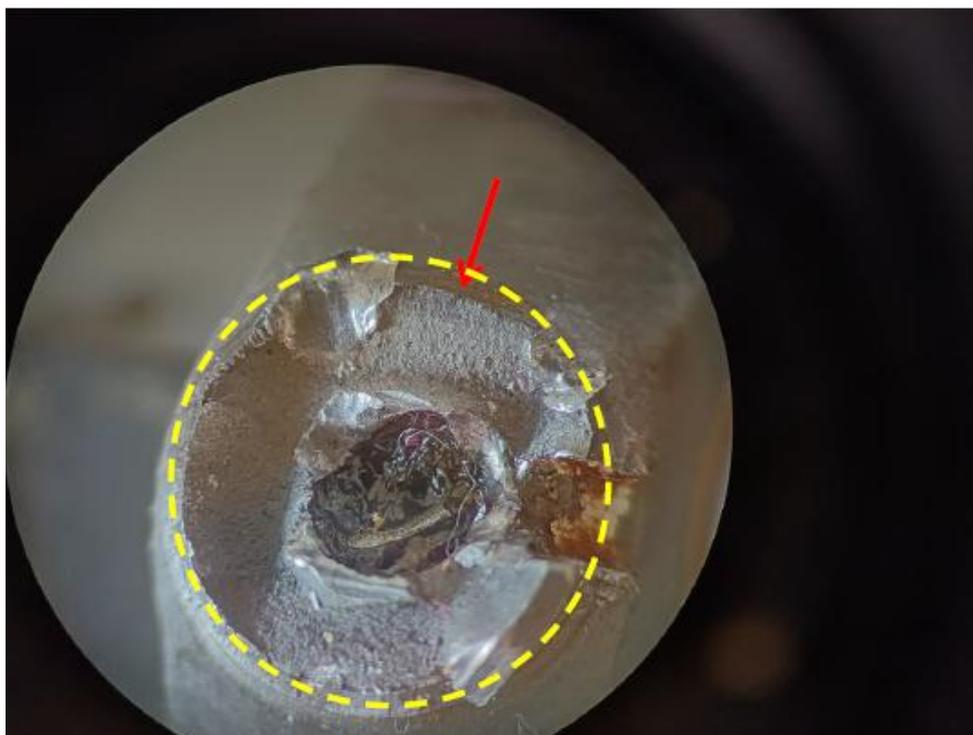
The rod end fracture face. The arrow shows the fatigue fracture initiation point. (Source: AMO)
